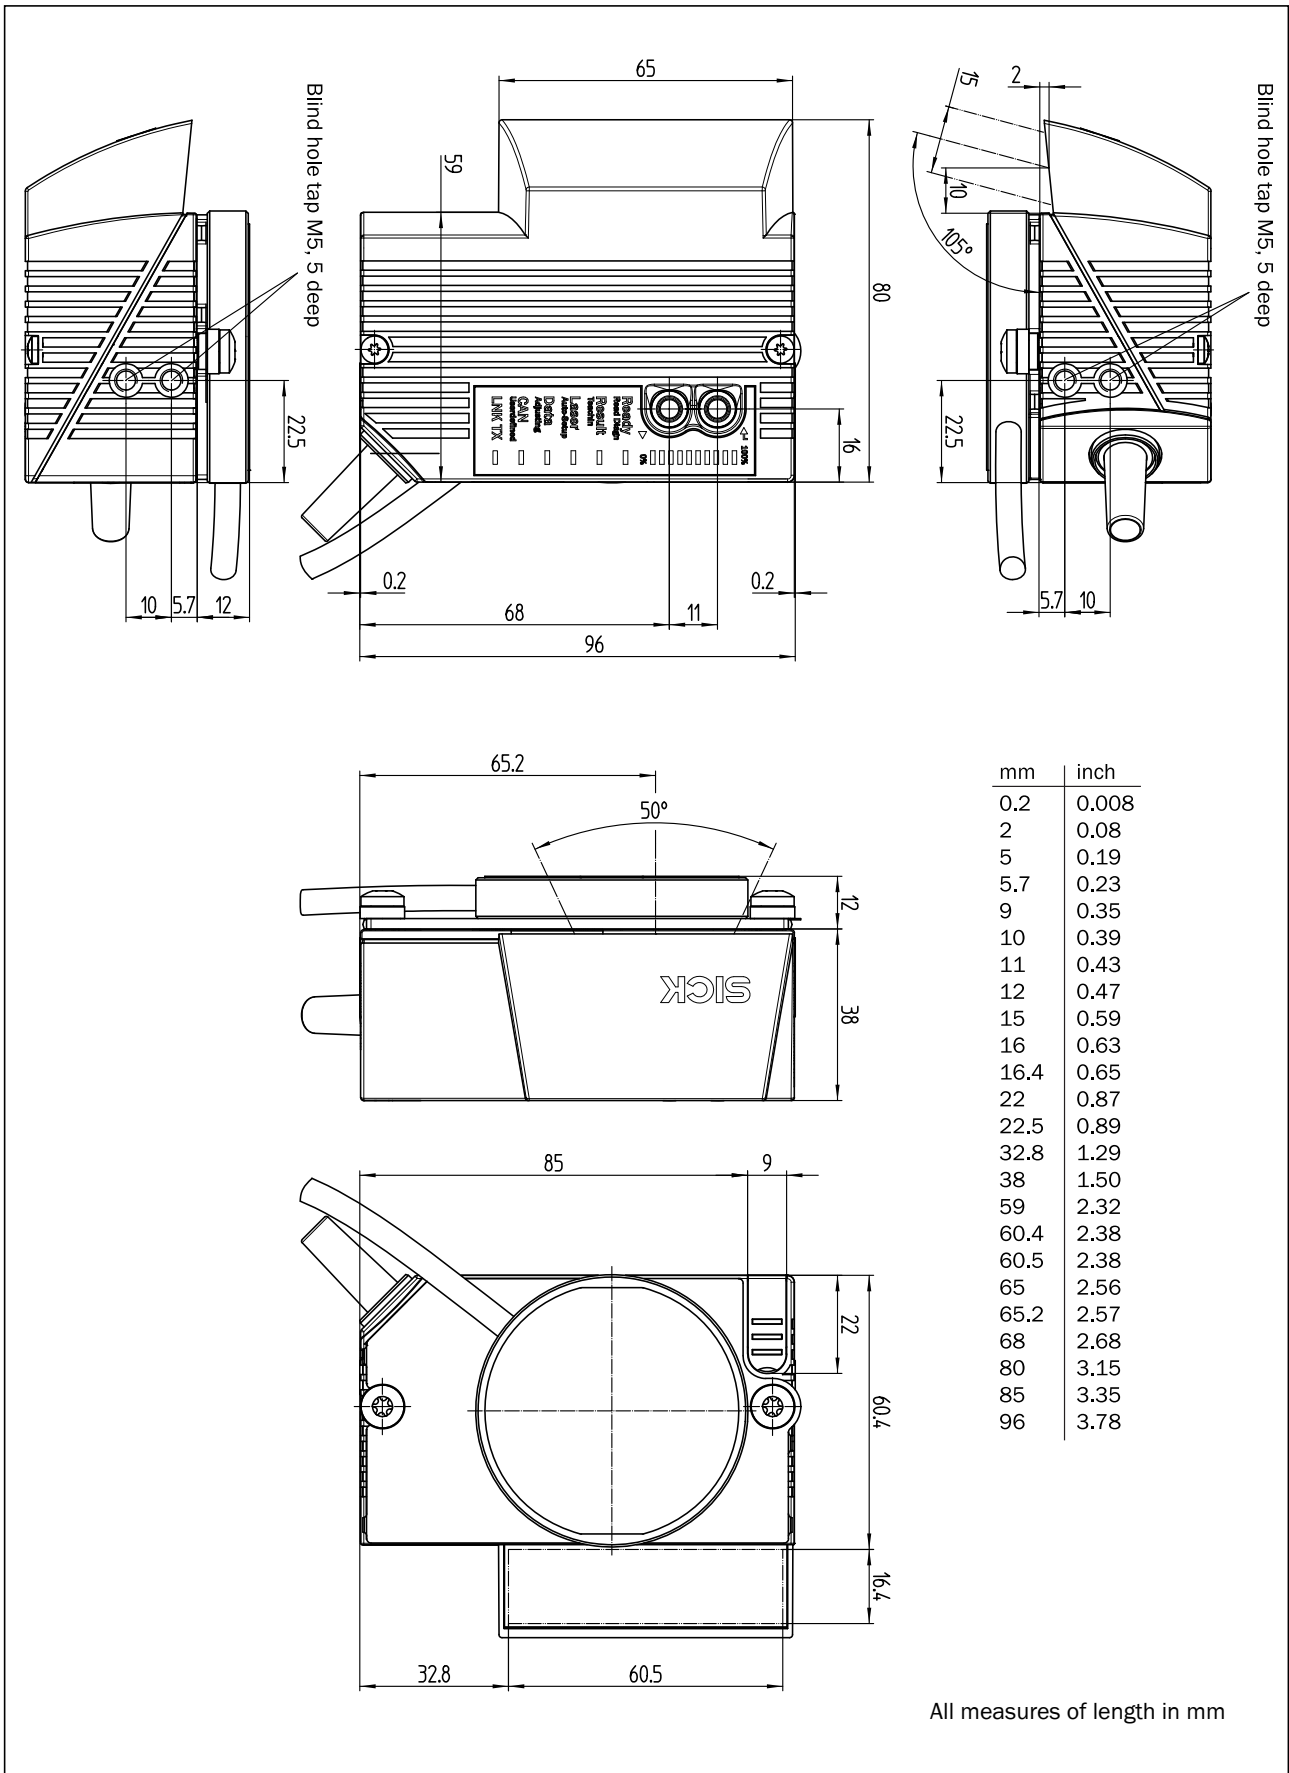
Dimensions of the line/raster scanner with heating and side end reading window
